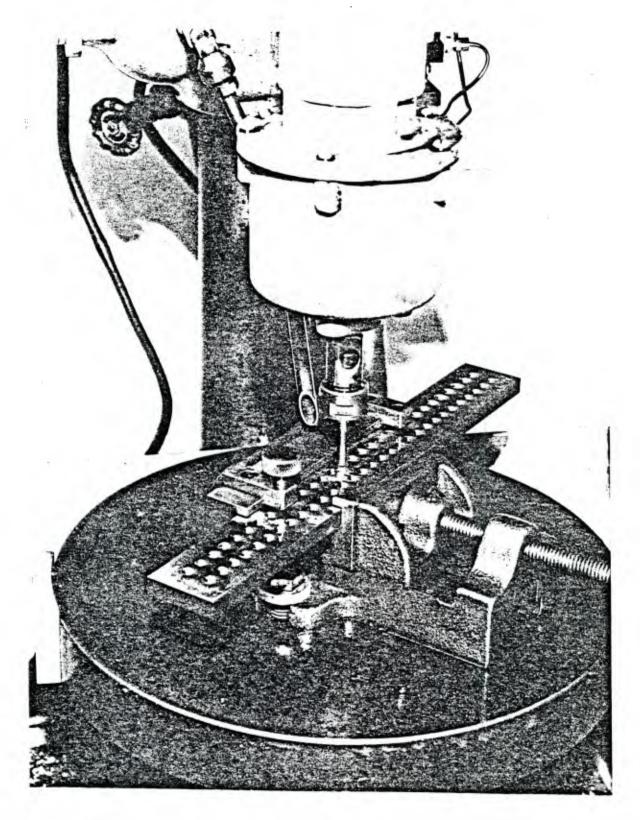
CLOSE-UP VIEW OF TAPPING HEAD AND VISE FOR HOLDING THE WORKPIECE
